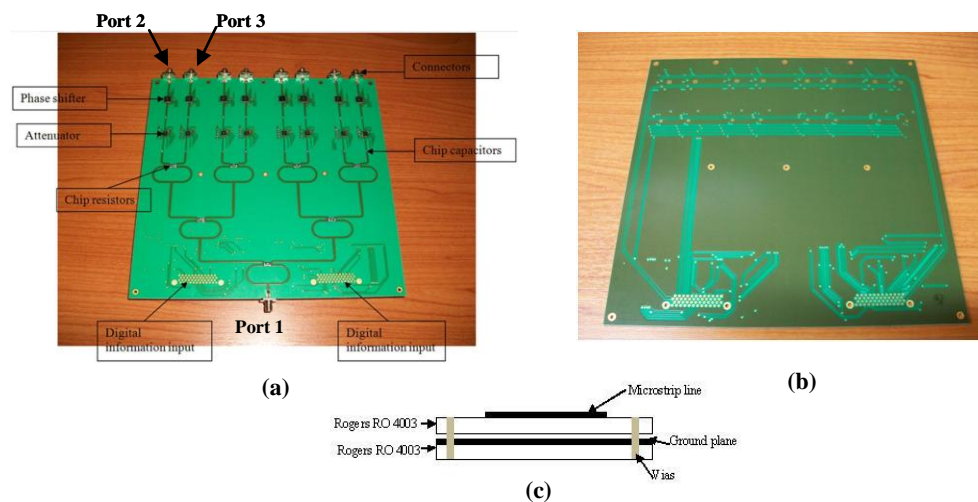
Beam-forming module; (a) Top view (b) Bottom view (c) Cross section
